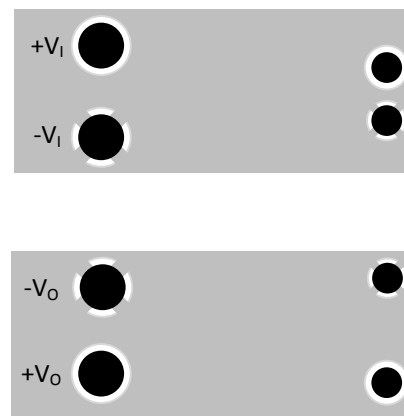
DCH01 Single Output Layout (Non-Component-Side View)
